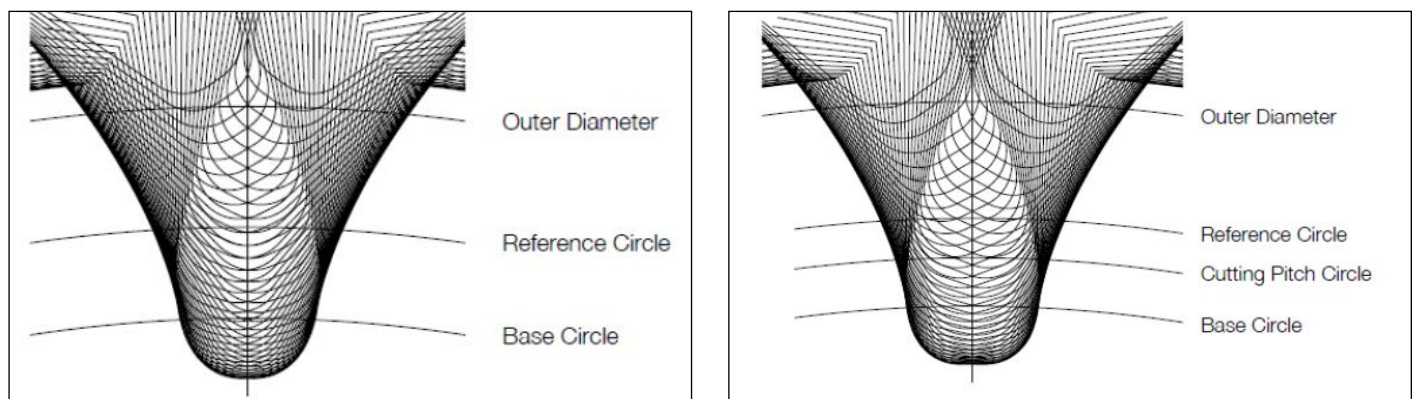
Left: Tooth space cut with 20° pressure angle on hob; Right: Tooth space cut with 11° pressure angle on hob.
